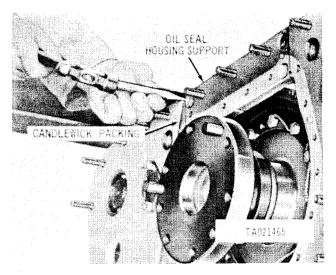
Installing candlewick packing between crankcase and oil seal housing support.
